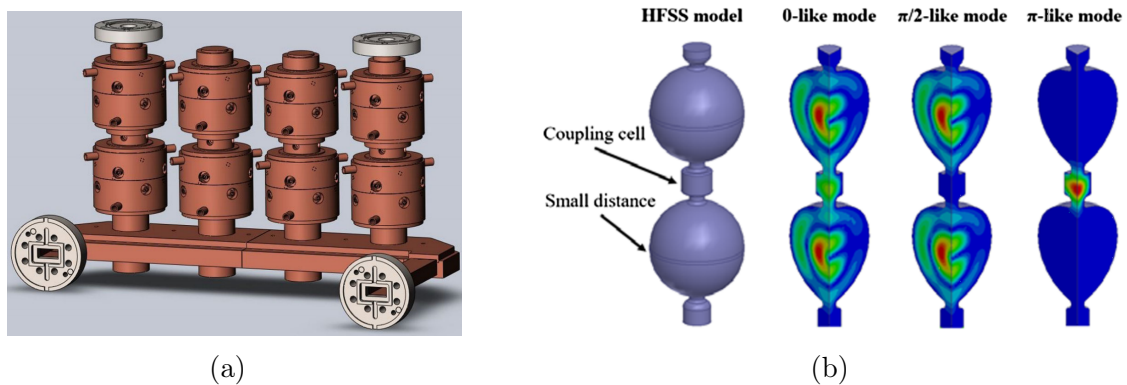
The mechanical design (a) of the correction cavity chain showing the waveguide flanges on the lower left and lower right and the vacuum pumping ports on top. Shown on the right (b) is the field patterns and operating modes in a single unit comprised of two spherical cavities and a coupling cell are also shown [122, 123].
